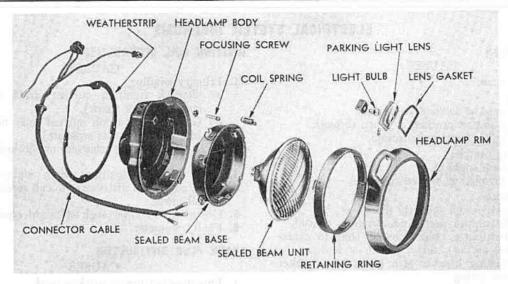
PARTS OF THE CHAMPION HEAD LAMP
